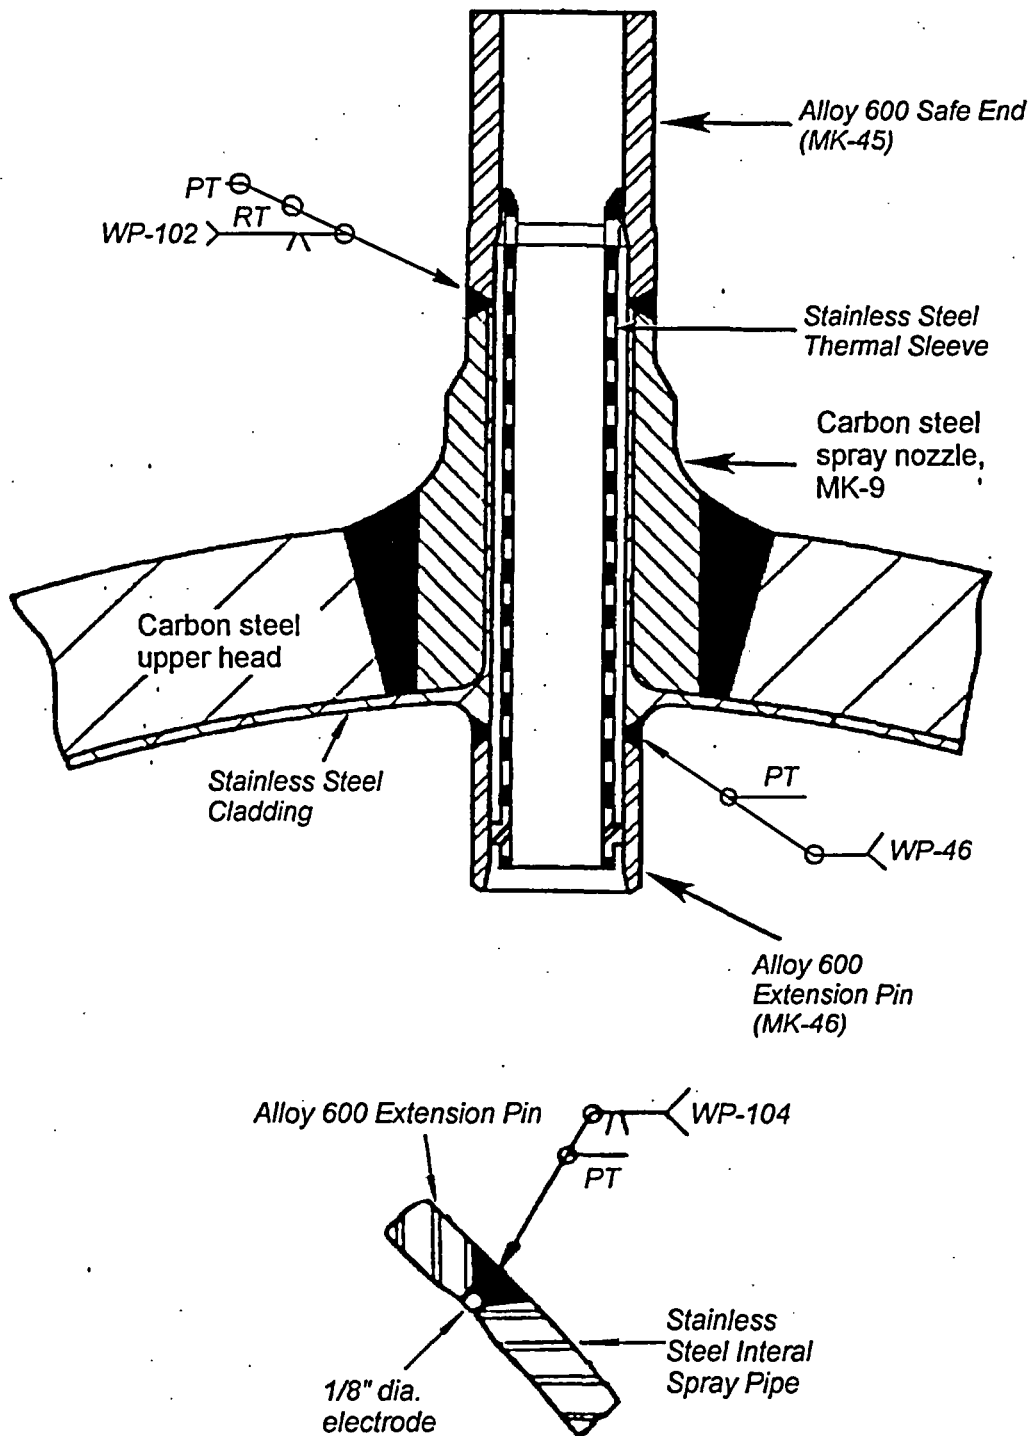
Top, detail of the 4-inch spray nozzle assembly. Bottom, detail of the extension pin to the internal spray pipe weld. See Figure 5 for detail of the weld buttons for positioning the thermal sleeve.
